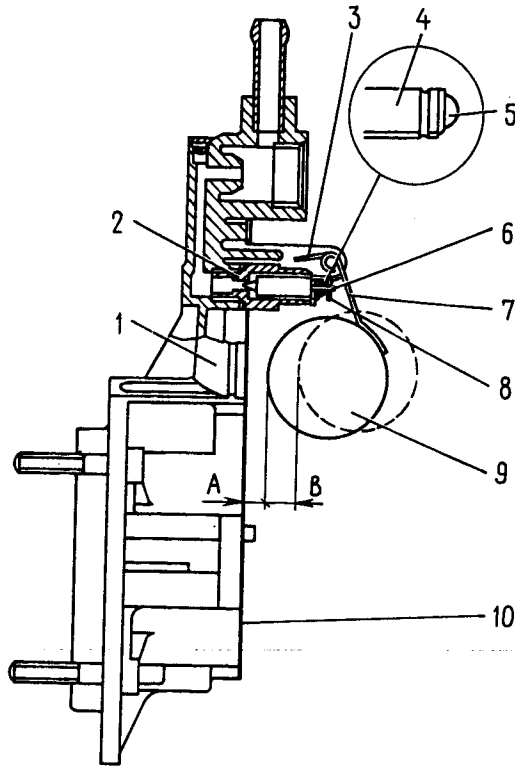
Float Chamber Fuel Level Adjustment:
